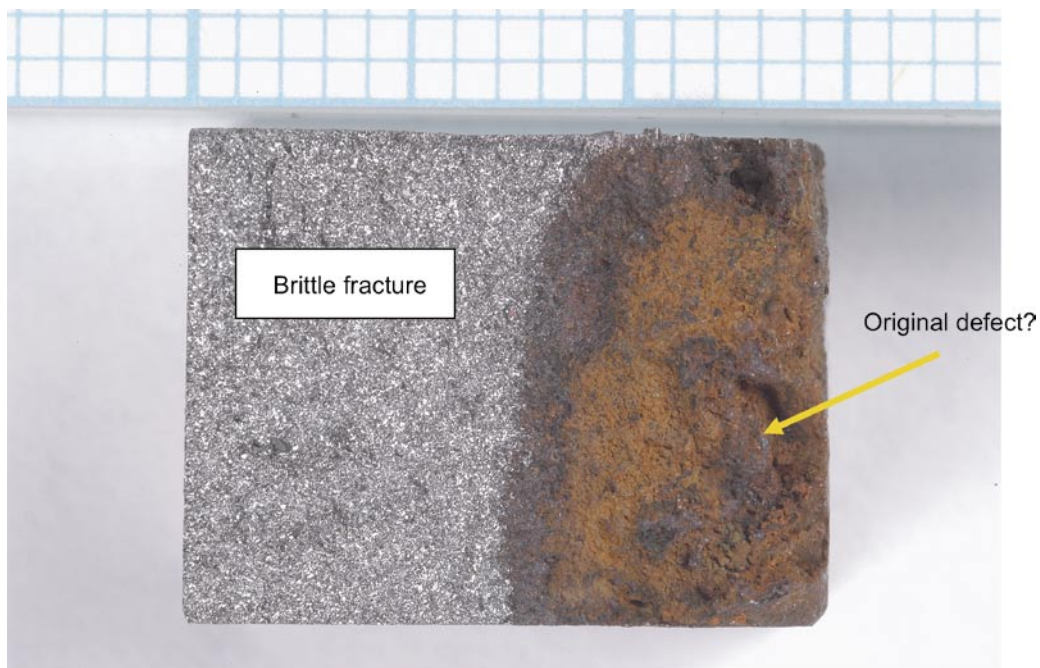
Fractographic view of fracture surface showing surface with brittle fracture (grey area) from new crack surfaces from the opening of the cracked body and cracked area with oxidation.
